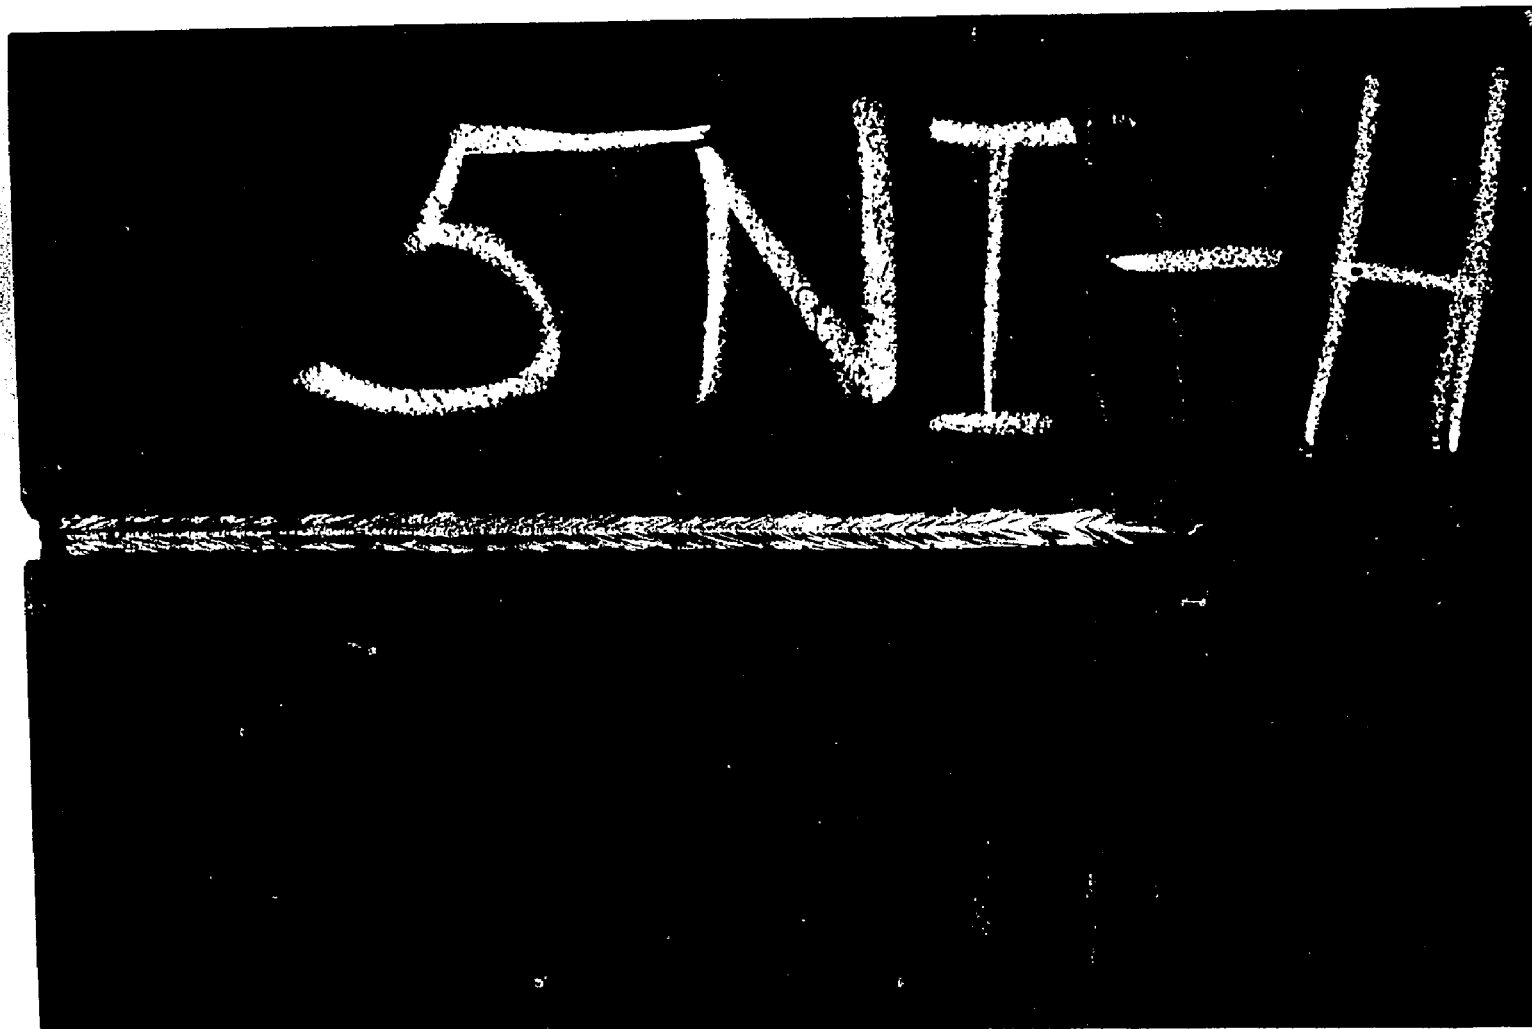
Welded Keyhole specimen-uncracked.
